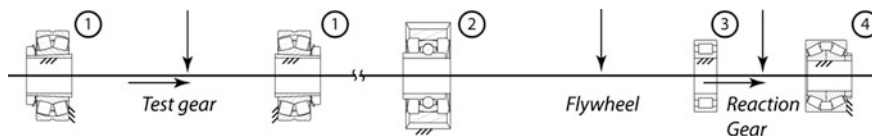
Bearings arrangement for one shaft branch of the test rig and average bearing stiffness in the loading range. 1. High-precision spherical roller bearing (1×10^9 N/m); 2. Y-bearing unit; 3. Wide-face single-row cylindrical roller bearing (6×10^8 N/m); 4. Double-row tapered roller bearing (1×10^9 N/m radial, 3×10^8 N/m axial)
